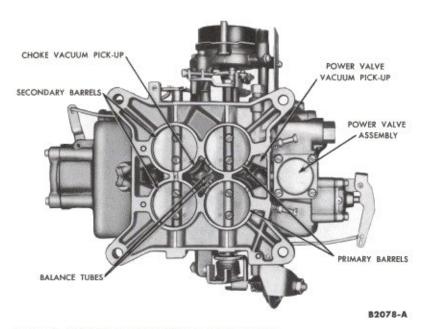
Ford 4-Barrel Carburetor—Bottom View
